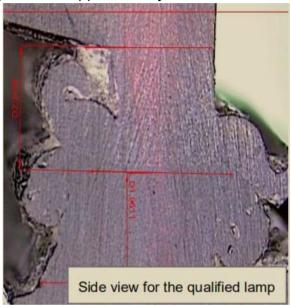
The section view of the qualified light after welding, averagely welding and strongly connected.
